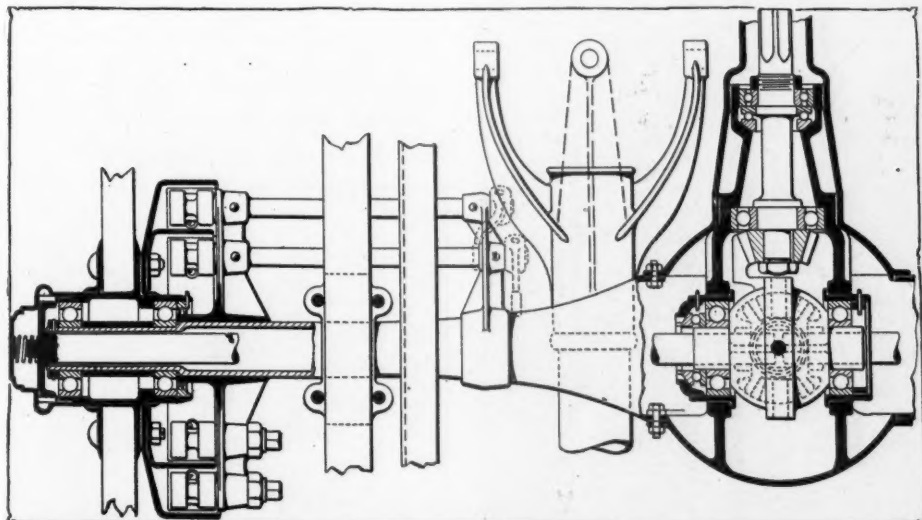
FULL-FLOATING TYPE OF REAR AXLE
